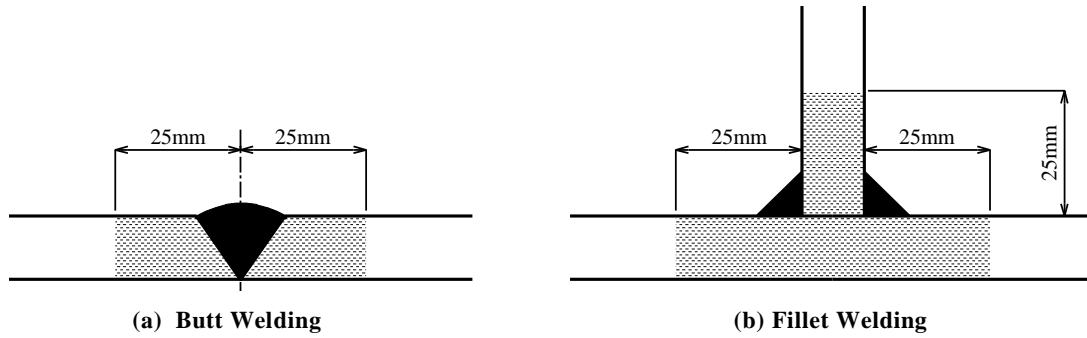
Heat-Affected Range Due to Welding
